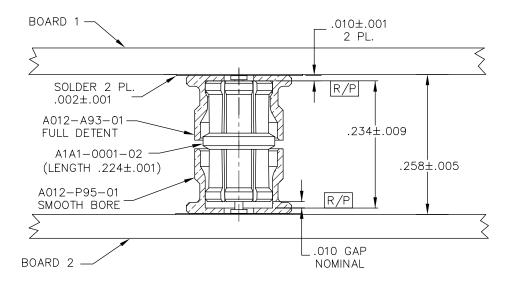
GPO Minimum Board–to–Board Tolerance Analysis
